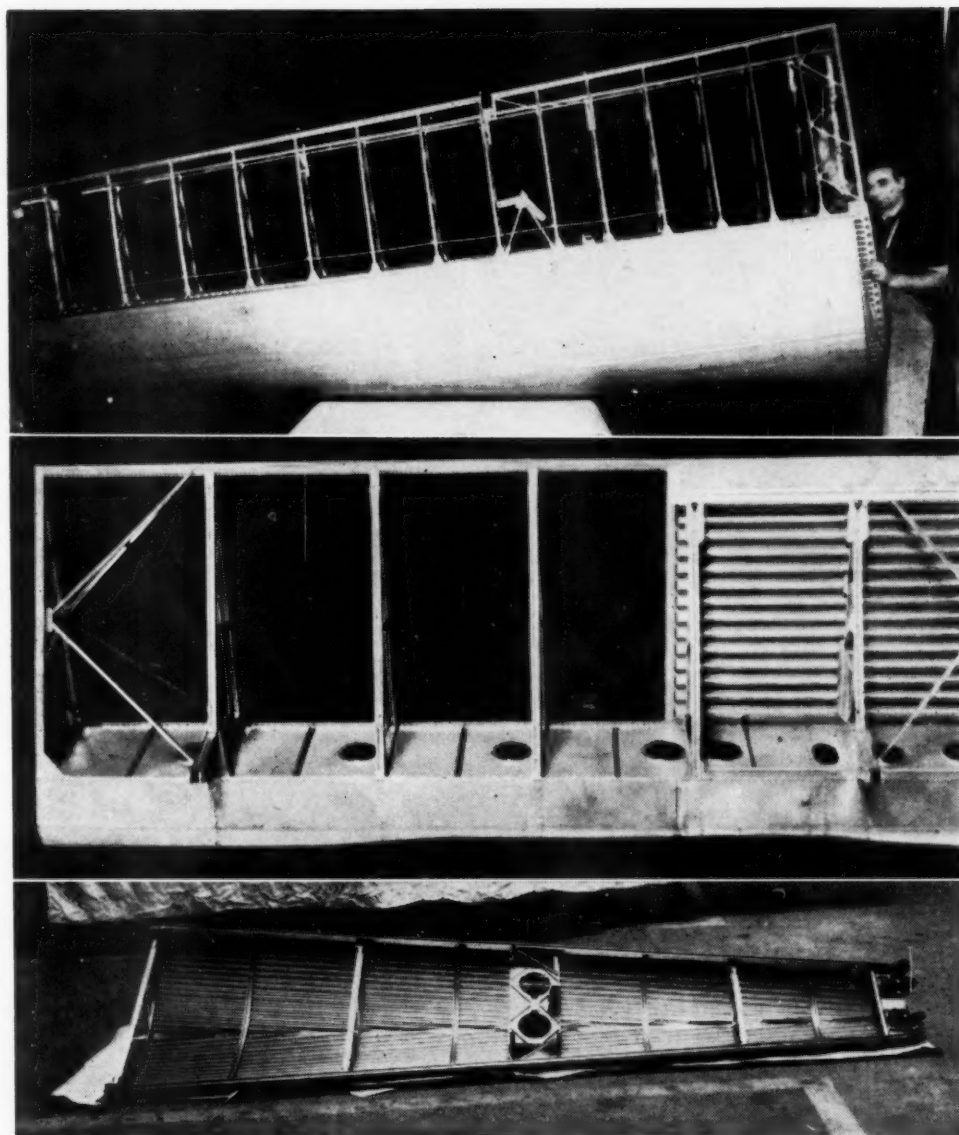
(Top) STAINLESS-STEEL WING PANEL (center) STAINLESS-STEEL INBOARD FLAP (Bottom) LOWER SECTION STAINLESS-STEEL MONOCOQUE FUSELAGE
